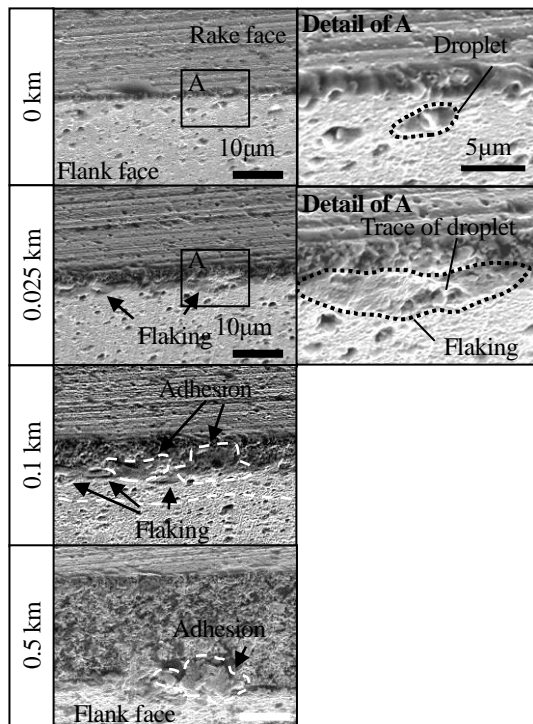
The cutting edge of TSN coated tool with increasing of cutting length.
